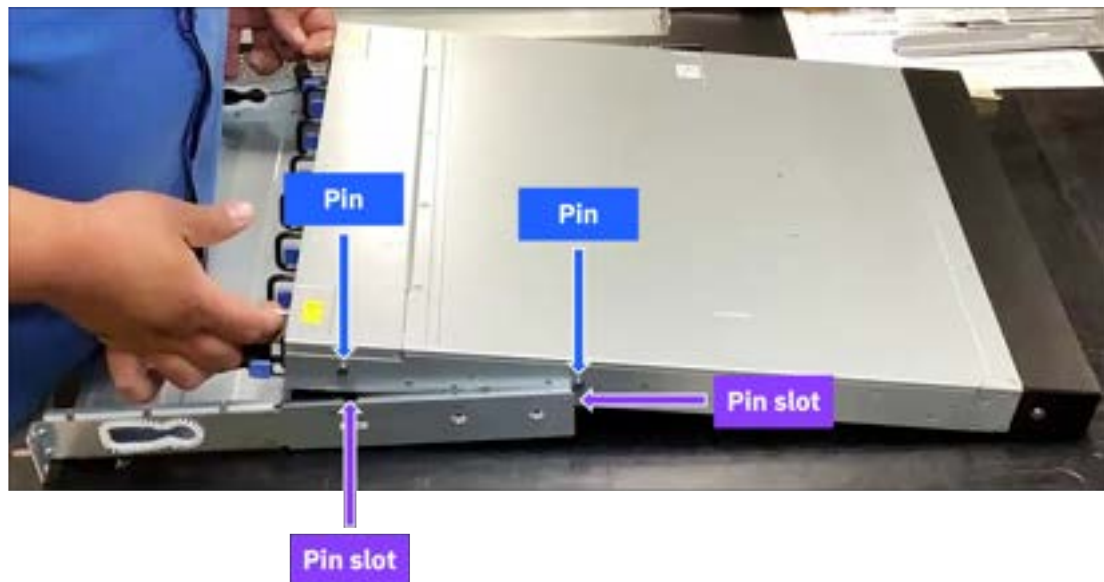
Sliding the switch enclosure into the bottom of the air duct
